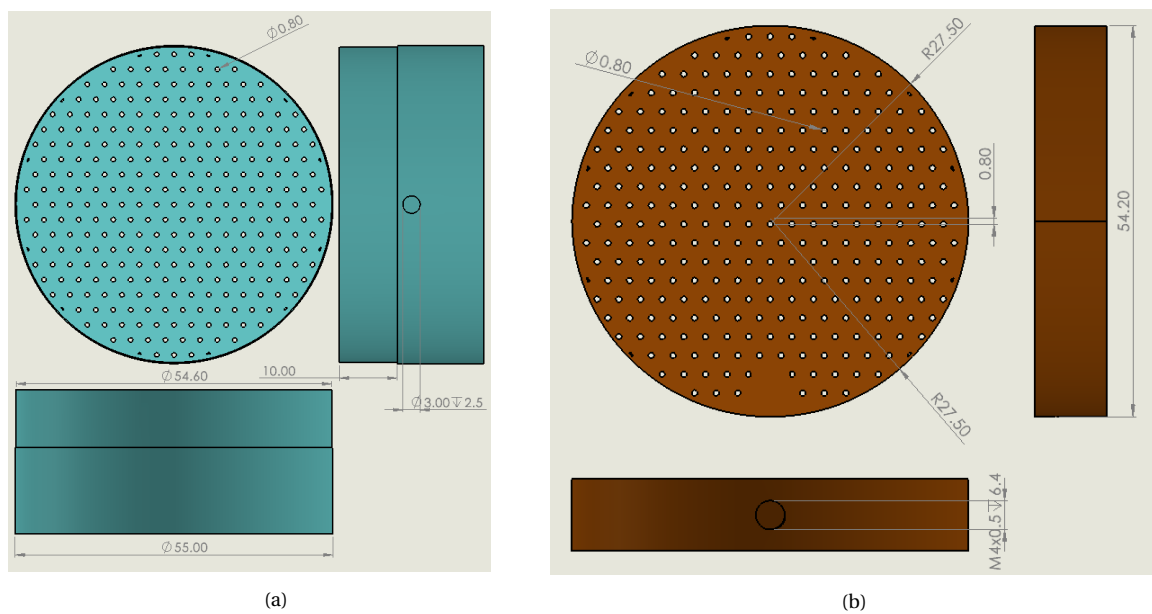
3-D printed Perforated disks for $l_h = 3$ mm hole spacing; (a) Top and Bottom disk; and (b): Middle disk (all dimensions are in mm)
